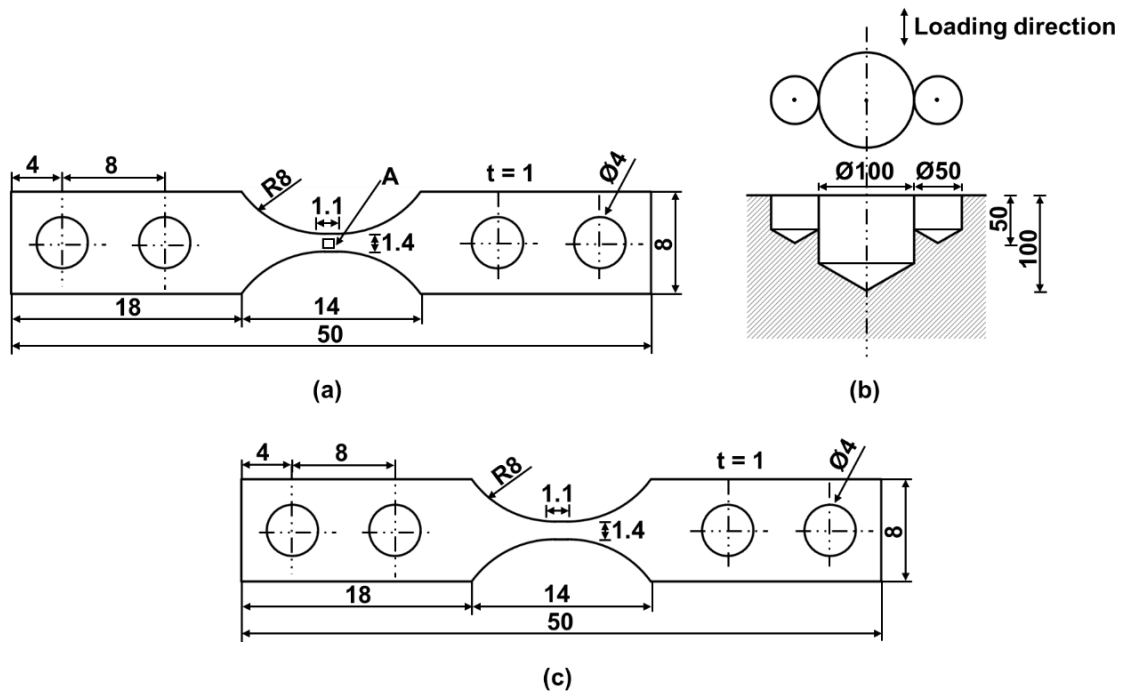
Specimen geometry for tension-compression fatigue test by using rotating-bending fatigue test machine (a) specimen with artificial defect (all dimensions in mm), (b) artificial defect, A, geometry (all dimensions in μm) (b) plane specimen geometry (all dimensions in mm).
